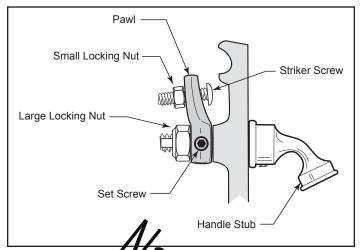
Turn the doc laten striker screw in or out to tighten or loosen the door latch.
